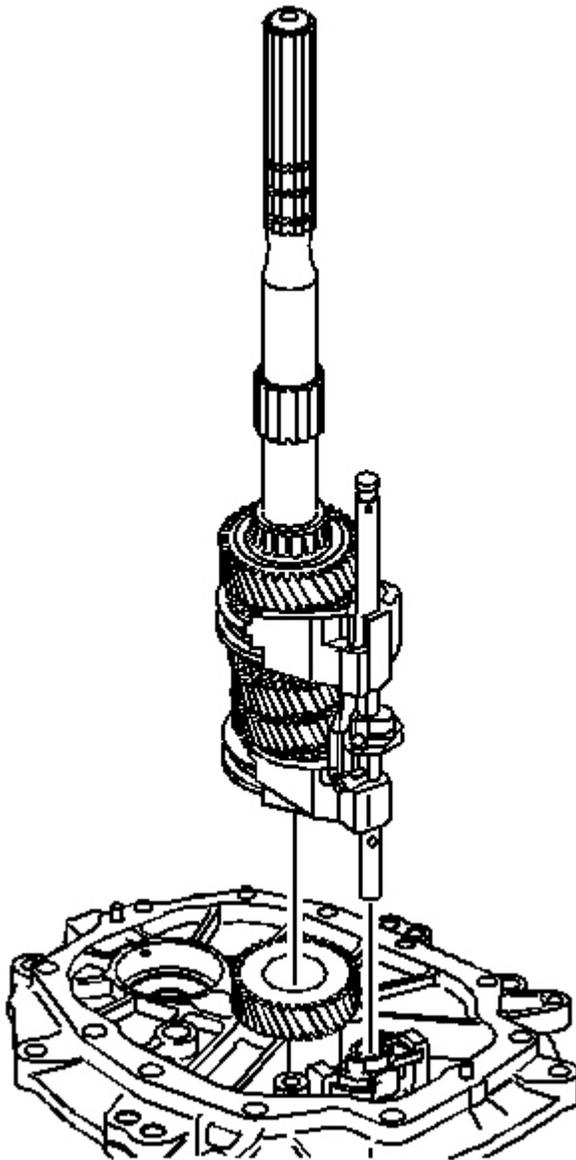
Installing/Removing Mainshaft Assembly & Shift Shaft Components
